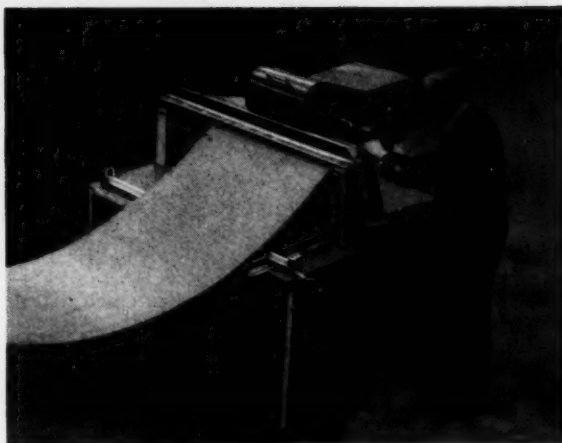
Mastabar Comet hydraulic conveyor belt power lacing machine
